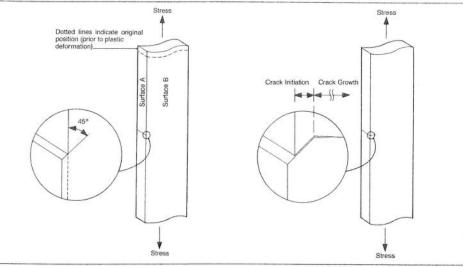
The slip plane is at 45 degrees to the surface A during the initiation stage of a fatigue crack. In the case of a bicycle frame tube, surface A would be the tube's outside surface and surface B would be a cross section of the tube wall. Fatigue cracks may be initiated at a tube's midsection — a piece of metal need not have an exposed edge to start fatigue cracks.
